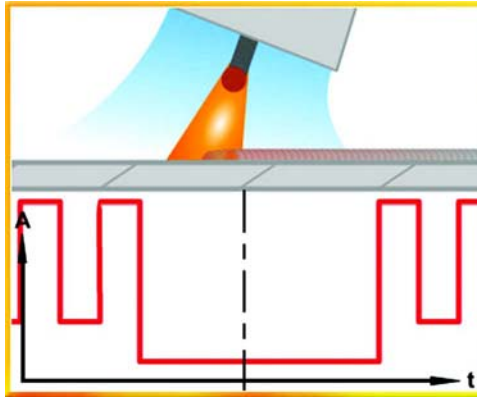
Pulse/Short Arc. This Process Enables Full Control of the Heat Input for Thin Sheet Welding and Has Even Been Used for the Root Runs on Pipes.
